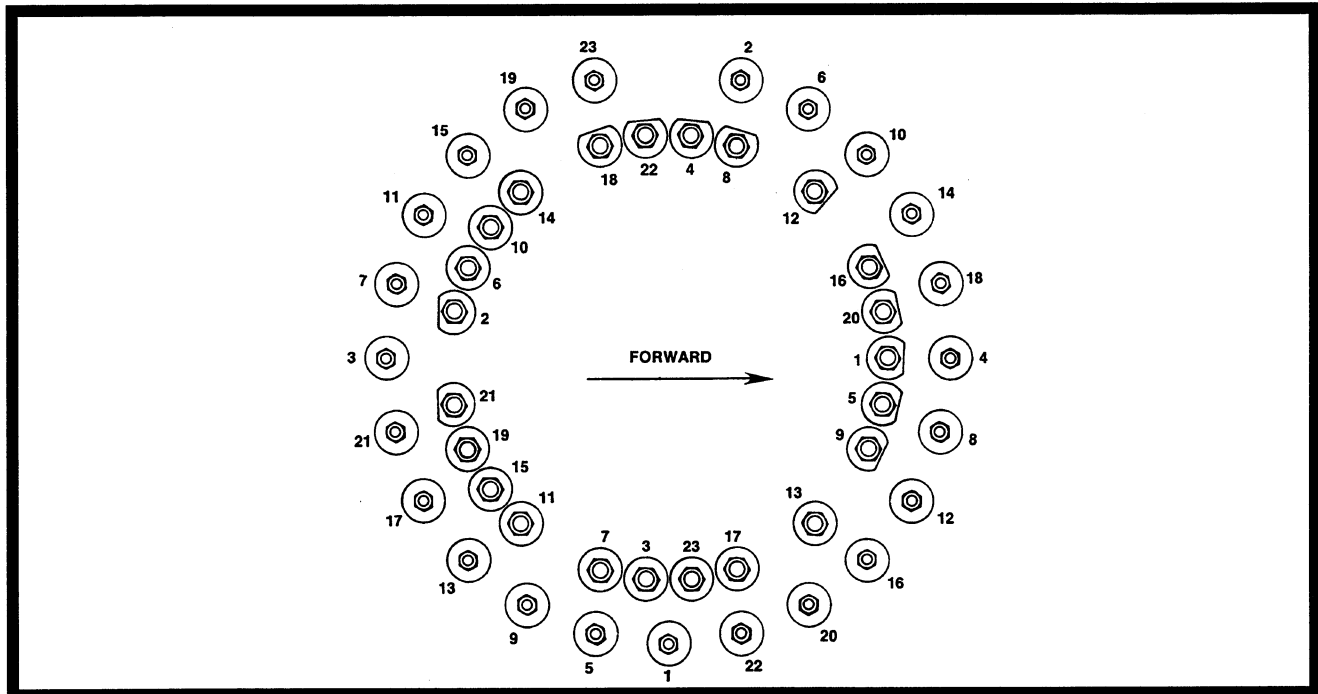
Swing Bearing Bolt Torquing Sequence.
